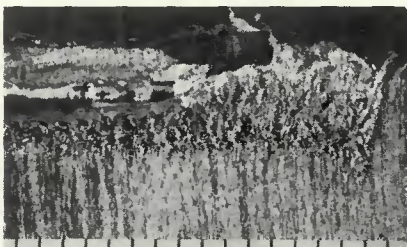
Longitudinal section through weld no. 2 (1100 Al). Rule divisions in millimeters
